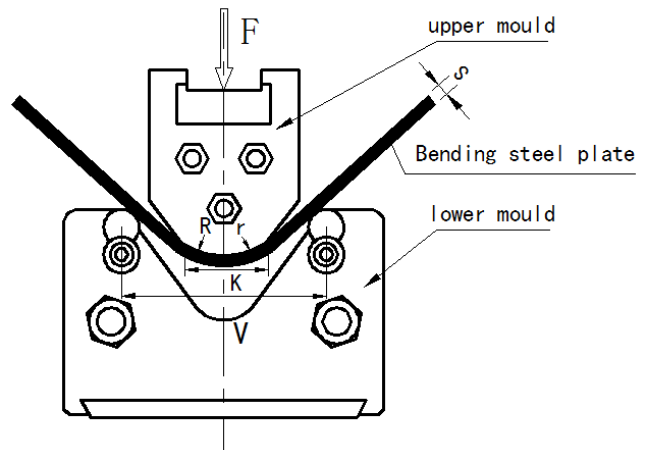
Diagram of Bending principle: F – Bending force; S – Thickness of the plate; V – Opening width of the lower mould; r – The inner radius of the plate bending; K – Horizontal projection width in bending deformation area
